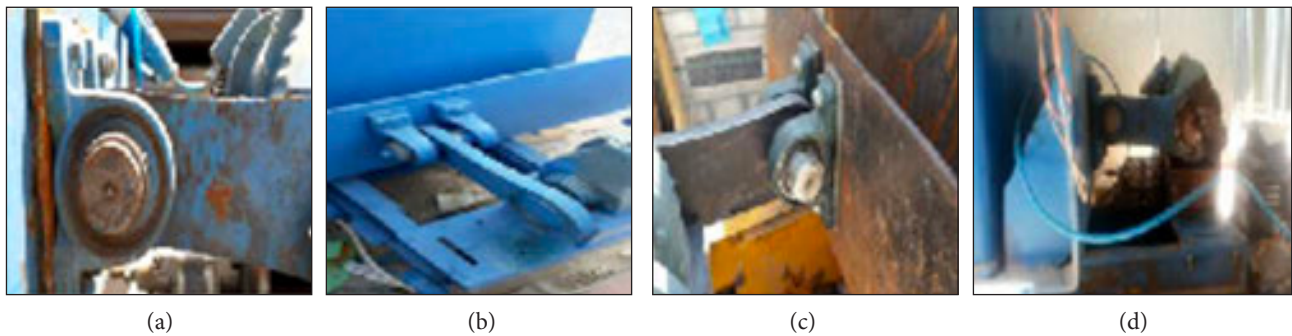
CAMA and pin connected during manufacturing of the shaking box.
